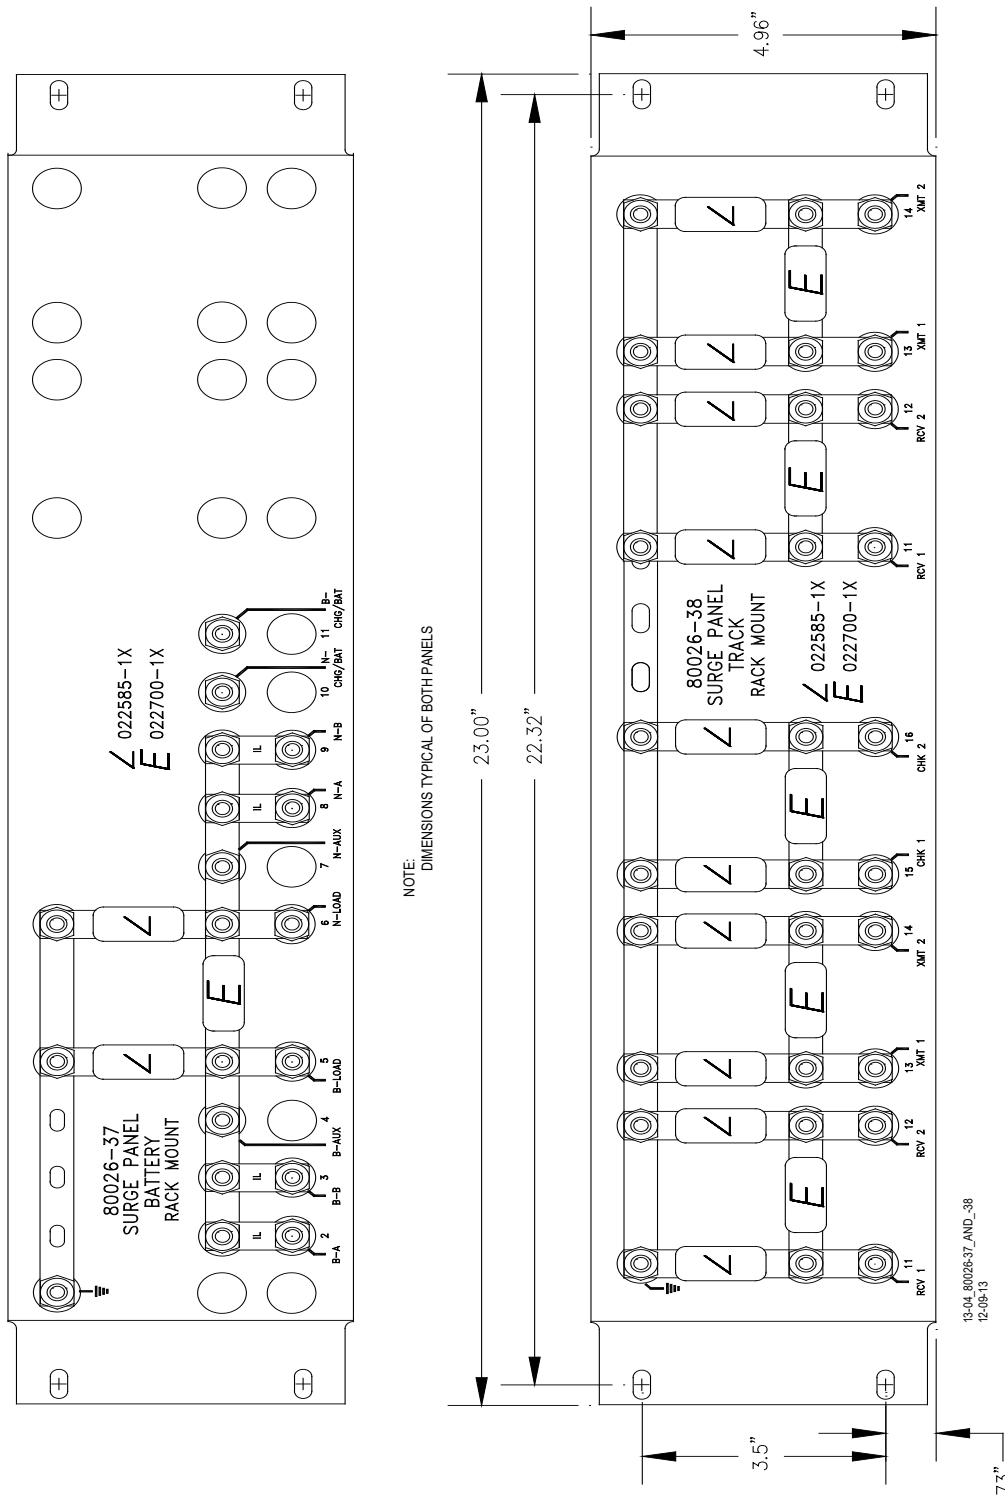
Rack Mounted Surge Panels, 80026-37 And -38
